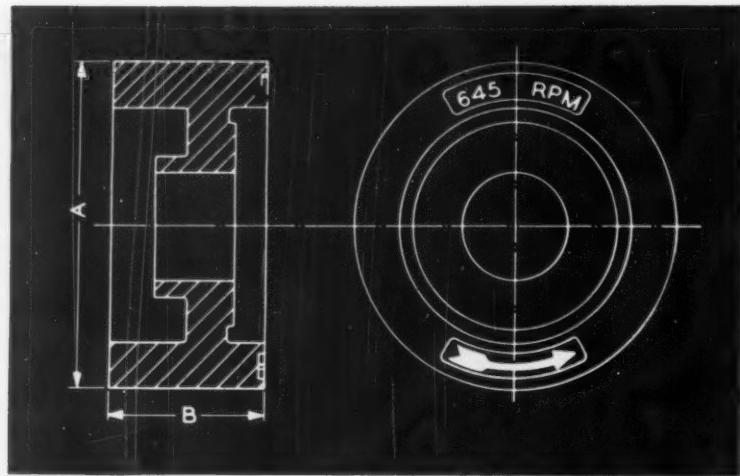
Interrupted cuts were taken with ceramic tools on driver pulley face showing direction and speed of rotation. Diameter (A) is 10 inches and width (B), 4 1/2 inches.
